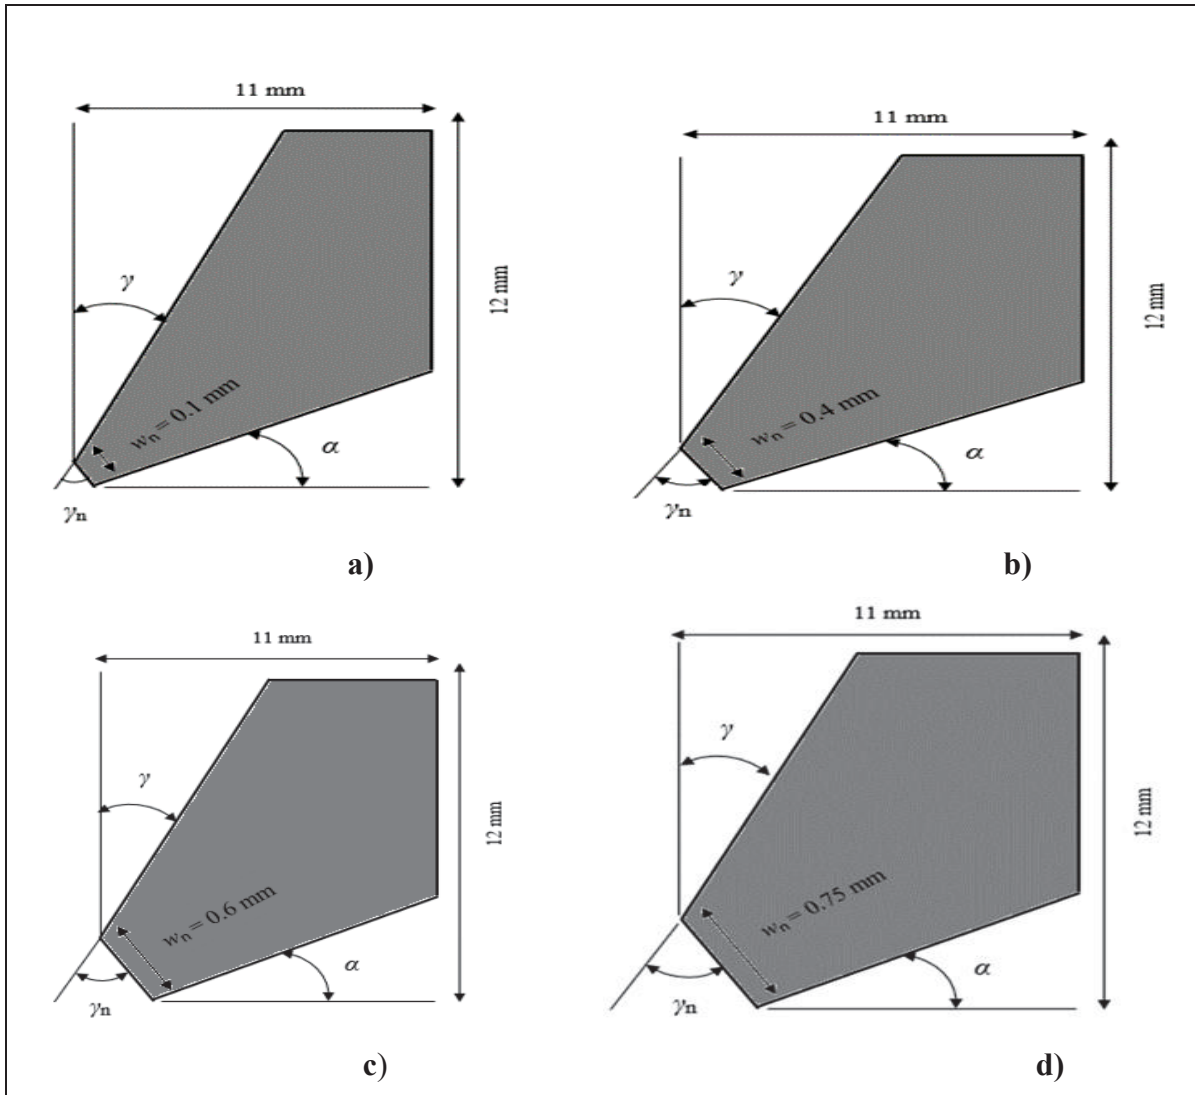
Chamfer cutting tool geometries with different chamfer widths w_n :
